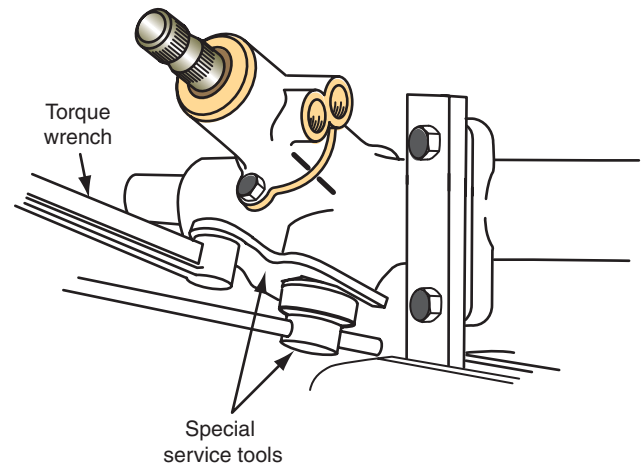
Installing rack guide seat, rack guide, and spring.
